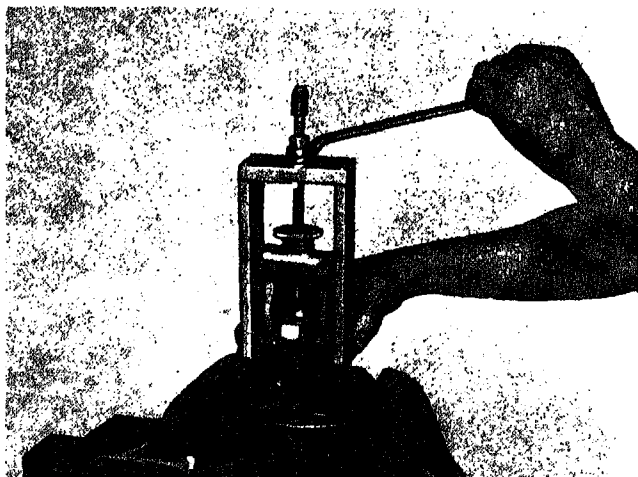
Using ST-709 to pull weight shaft assembly
